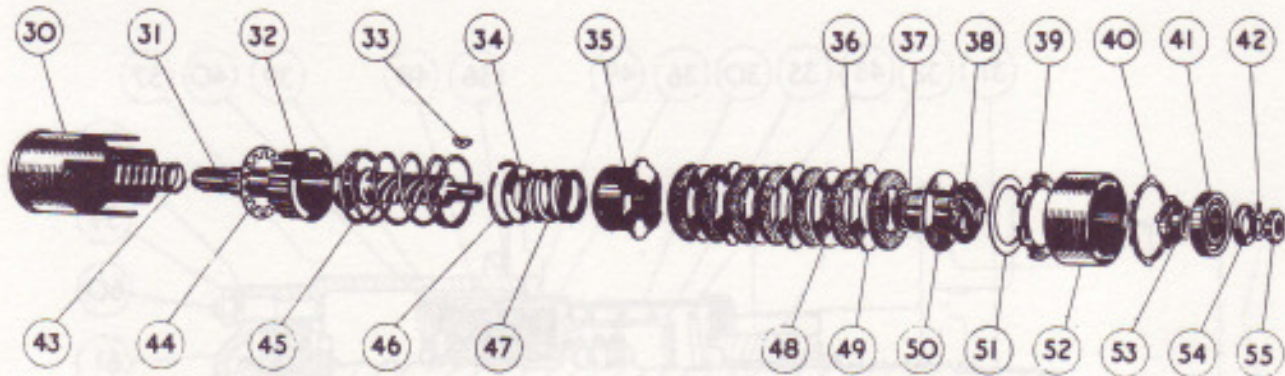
"EXPLODED" VIEW OF DRIVE.
